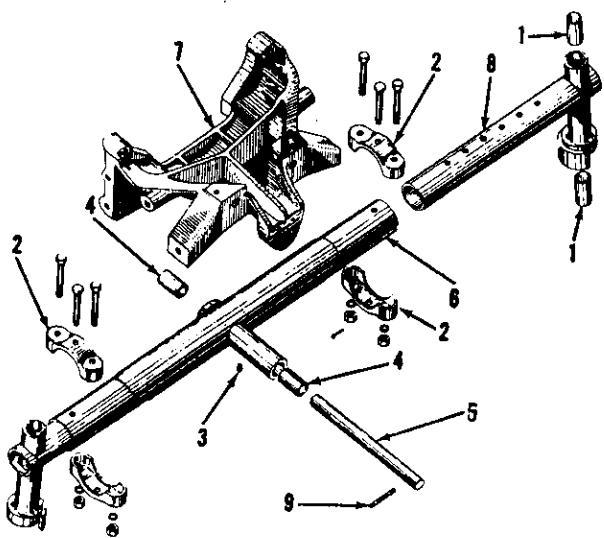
Exploded view of Series B-275 adjustable front axle and component parts. Bushings (1 and 4) are pre-sized. Shims (10—Fig. 2) are also used with this axle.
